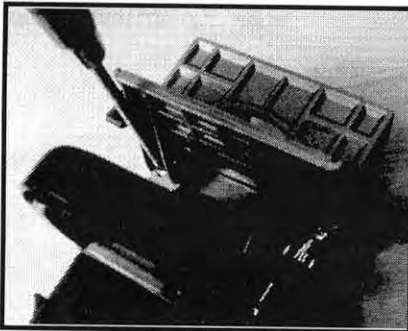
Removing the JS100A's vertical screws for disassembly
